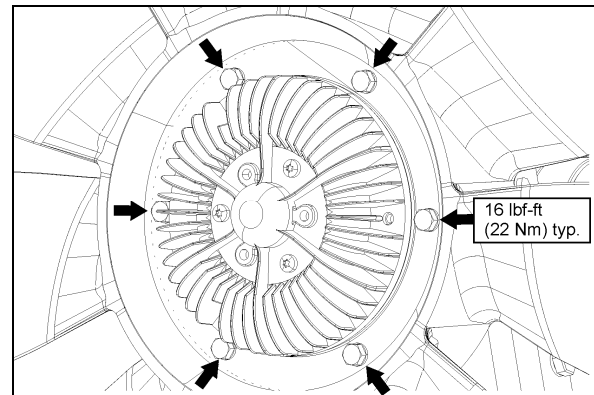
RADIATOR FAN MOUNTING BOLTS 05125
